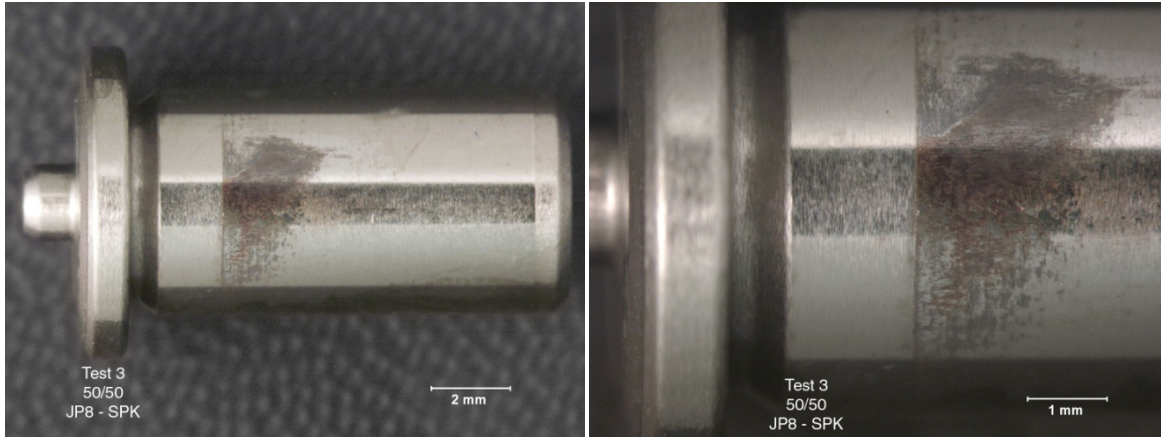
Upper Piston, Injector Hydraulic Coupling, 50/50 JP-8/SPK
